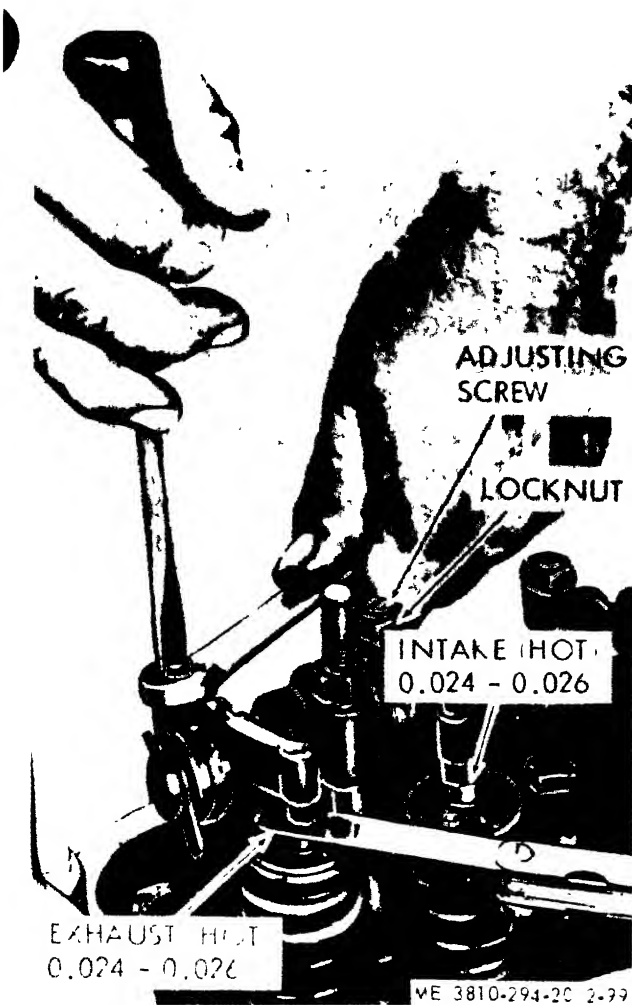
Adjusting valve stem to rocker arm clearance.
